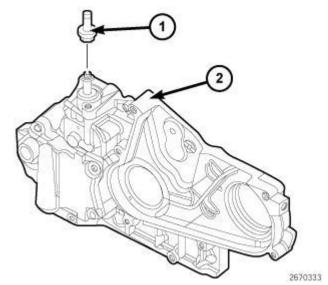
Front Cover & Vacuum Pump Check Valve Courtesy of CHRYSLER LLC
